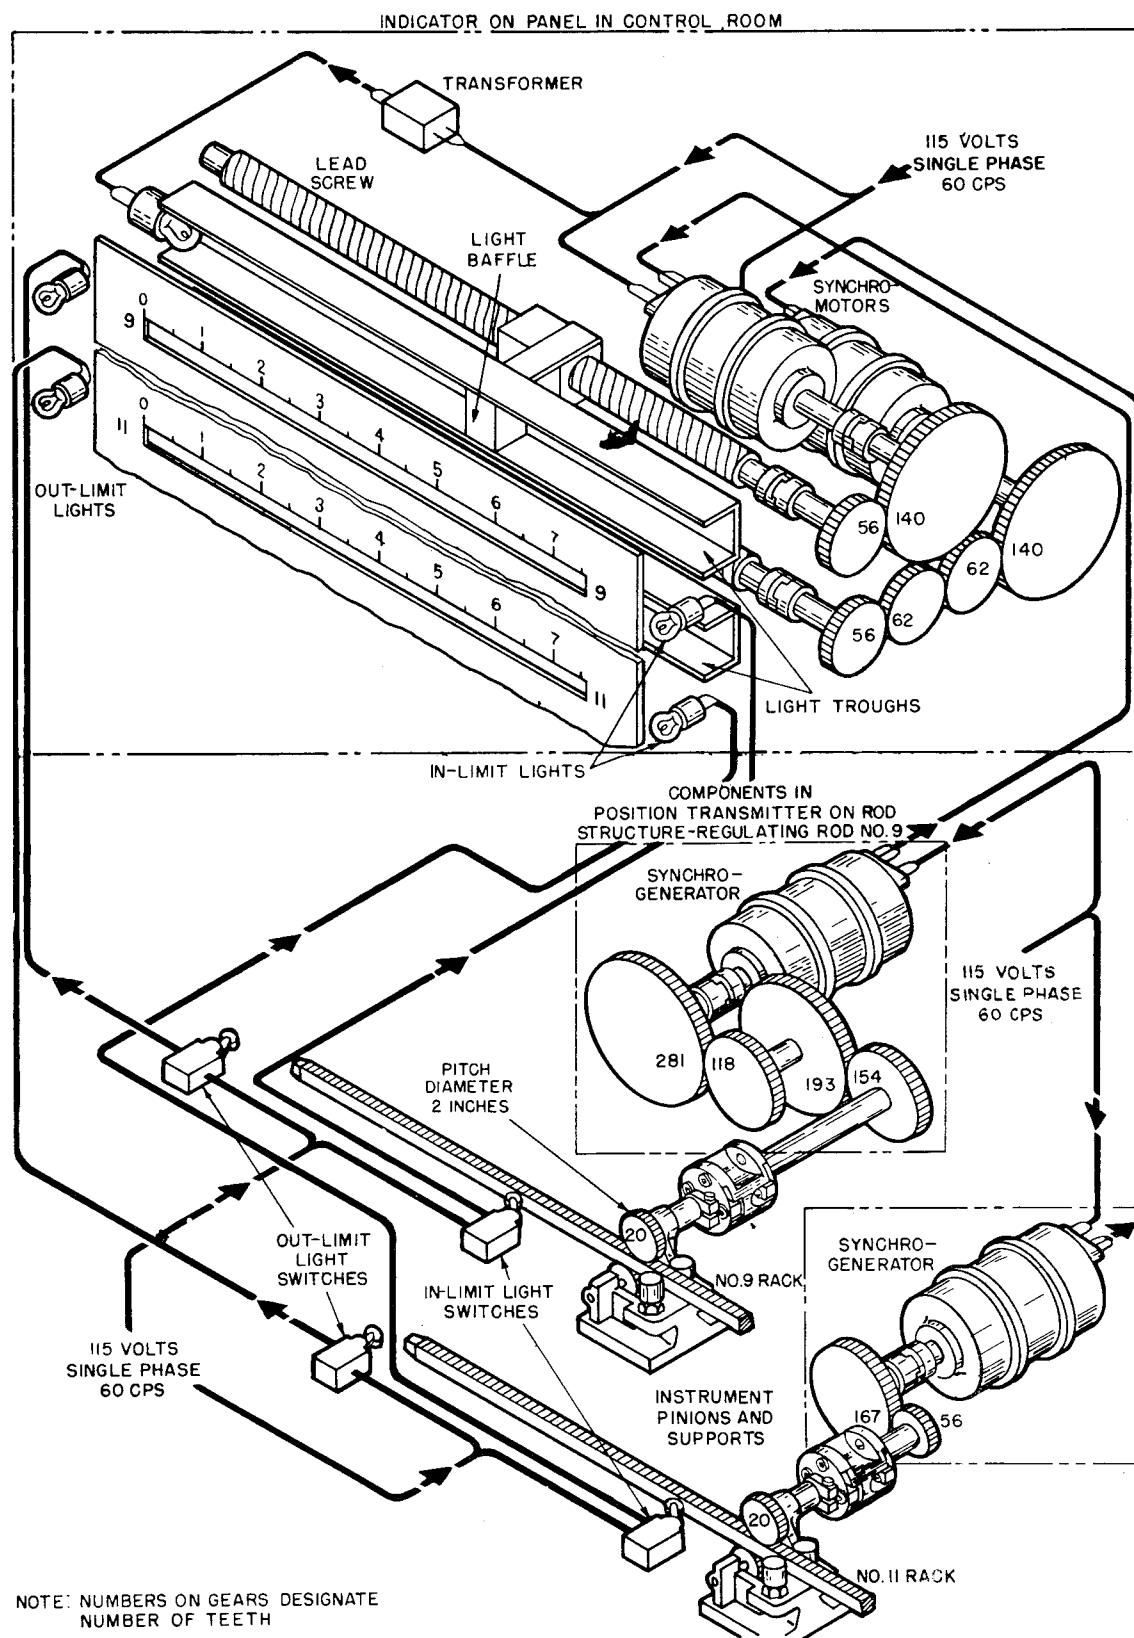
COARSE ROD-POSITION INDICATOR
